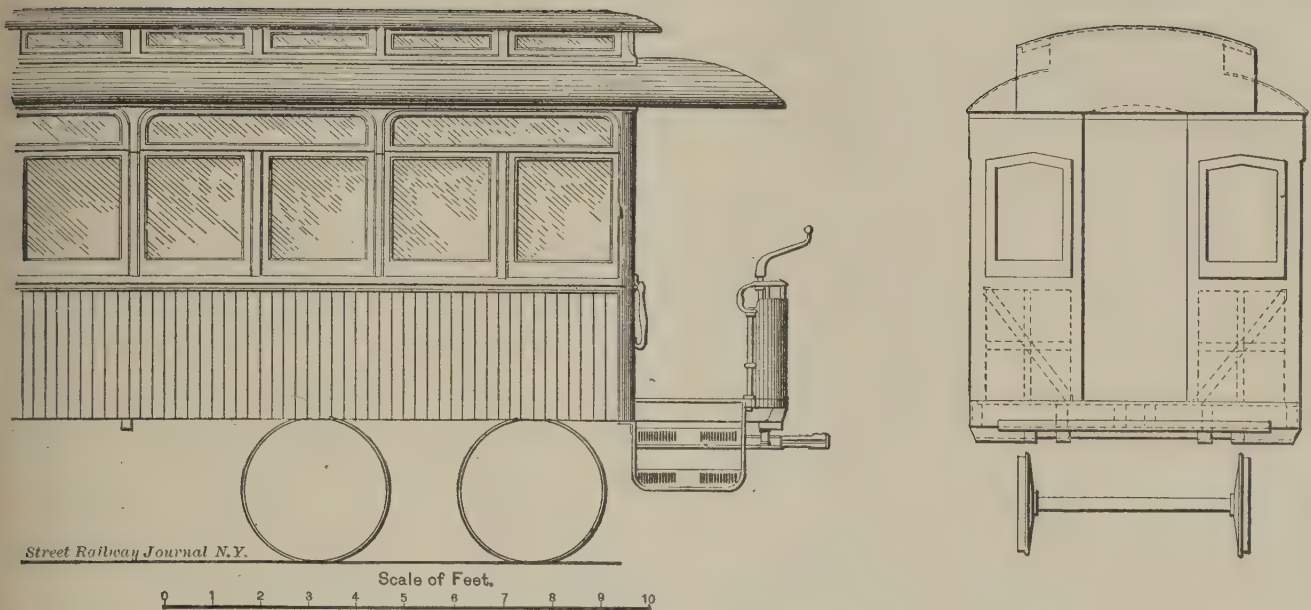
EIGHT WHEEL CLOSED CAR—PULLMAN'S PALACE CAR CO.
